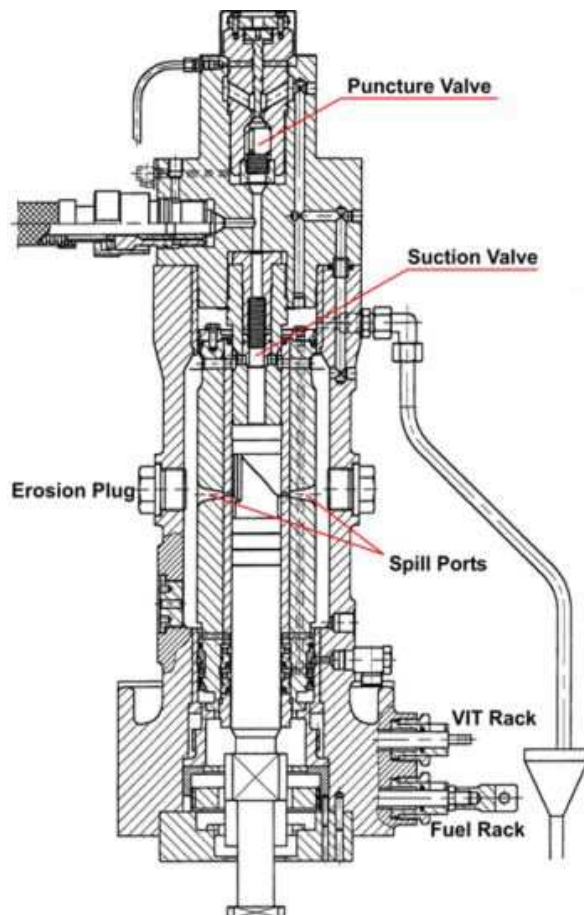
The adjustment mechanism of fuel injection timing for high-pressure valve pumps of SULZER RTA-53 engines [29]
